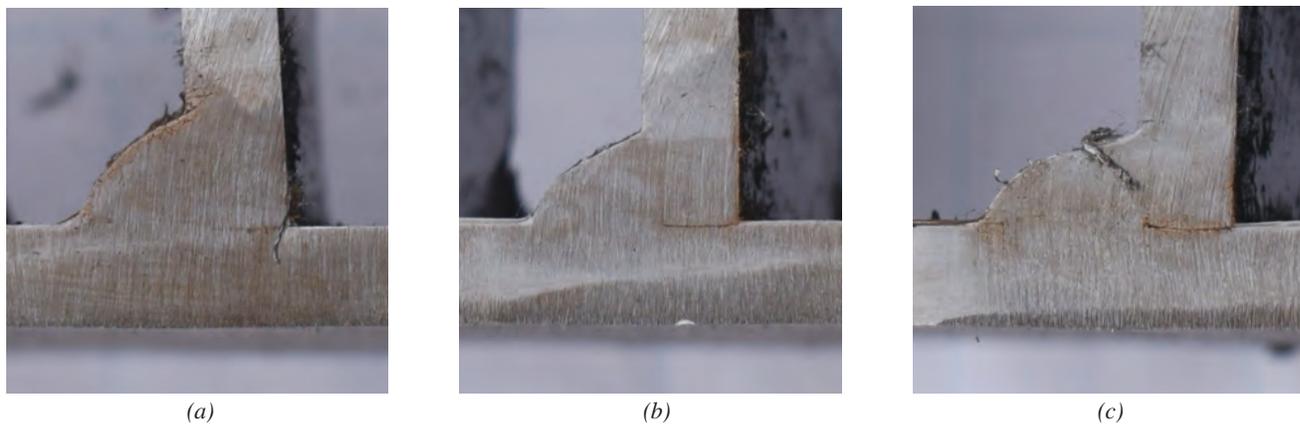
Fillet weld specimens—position C: (a) location 5; (b) location 6; (c) location 7.
